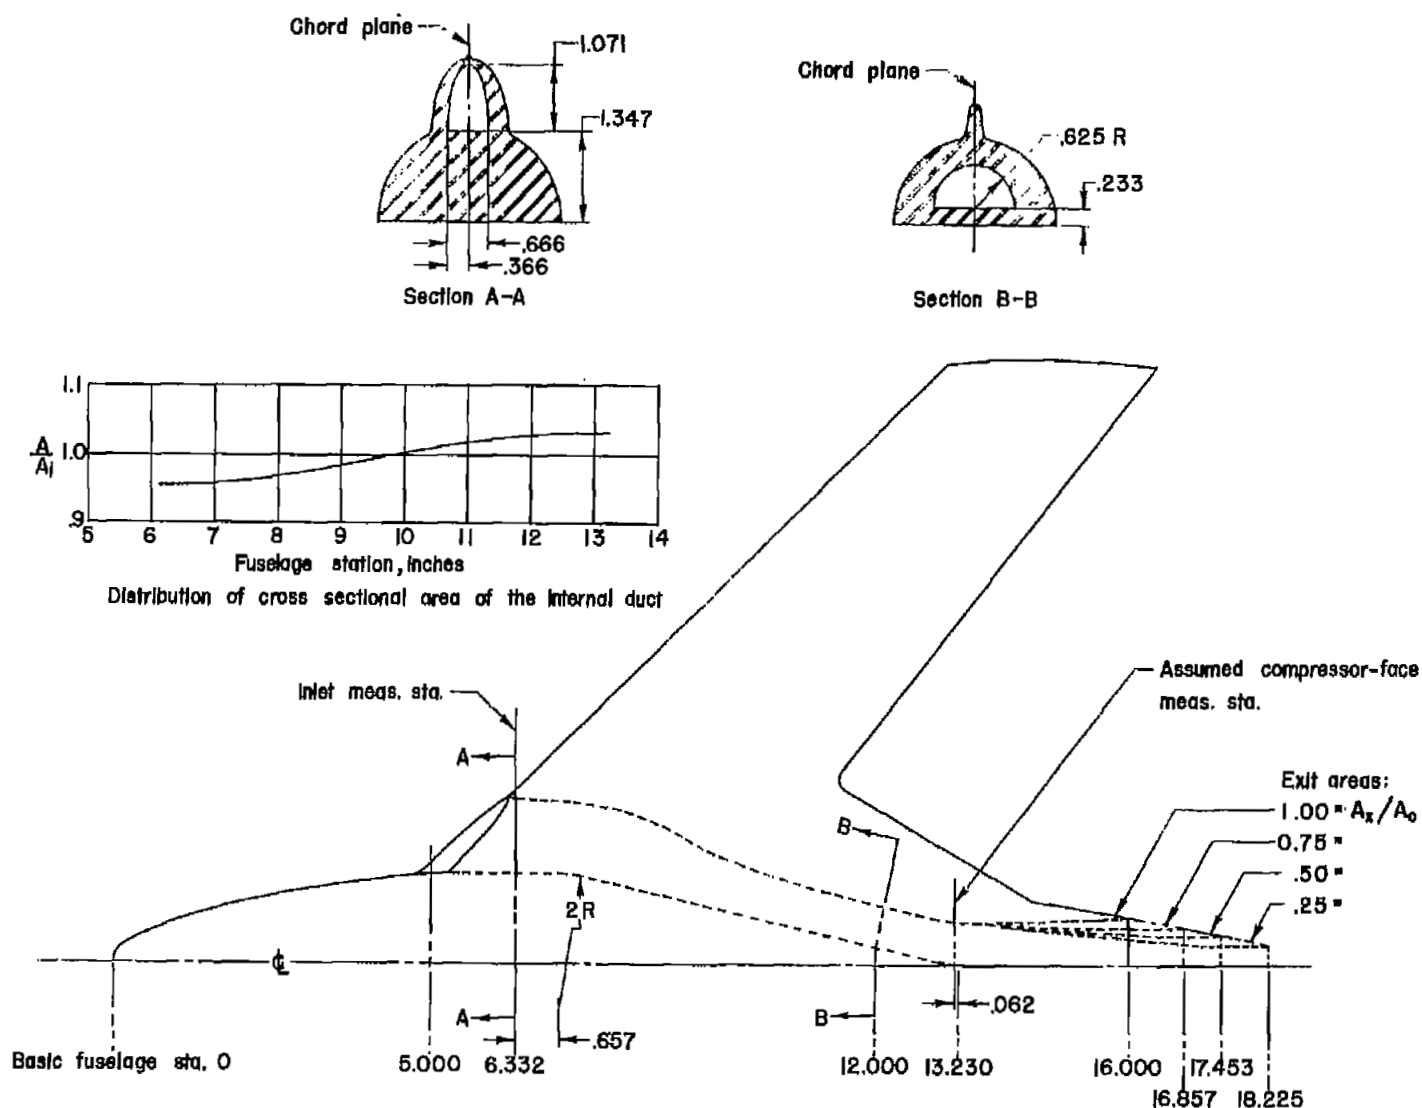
Plan view of inlet model showing the details of internal ducting and exit configuration. All dimensions are in inches.
